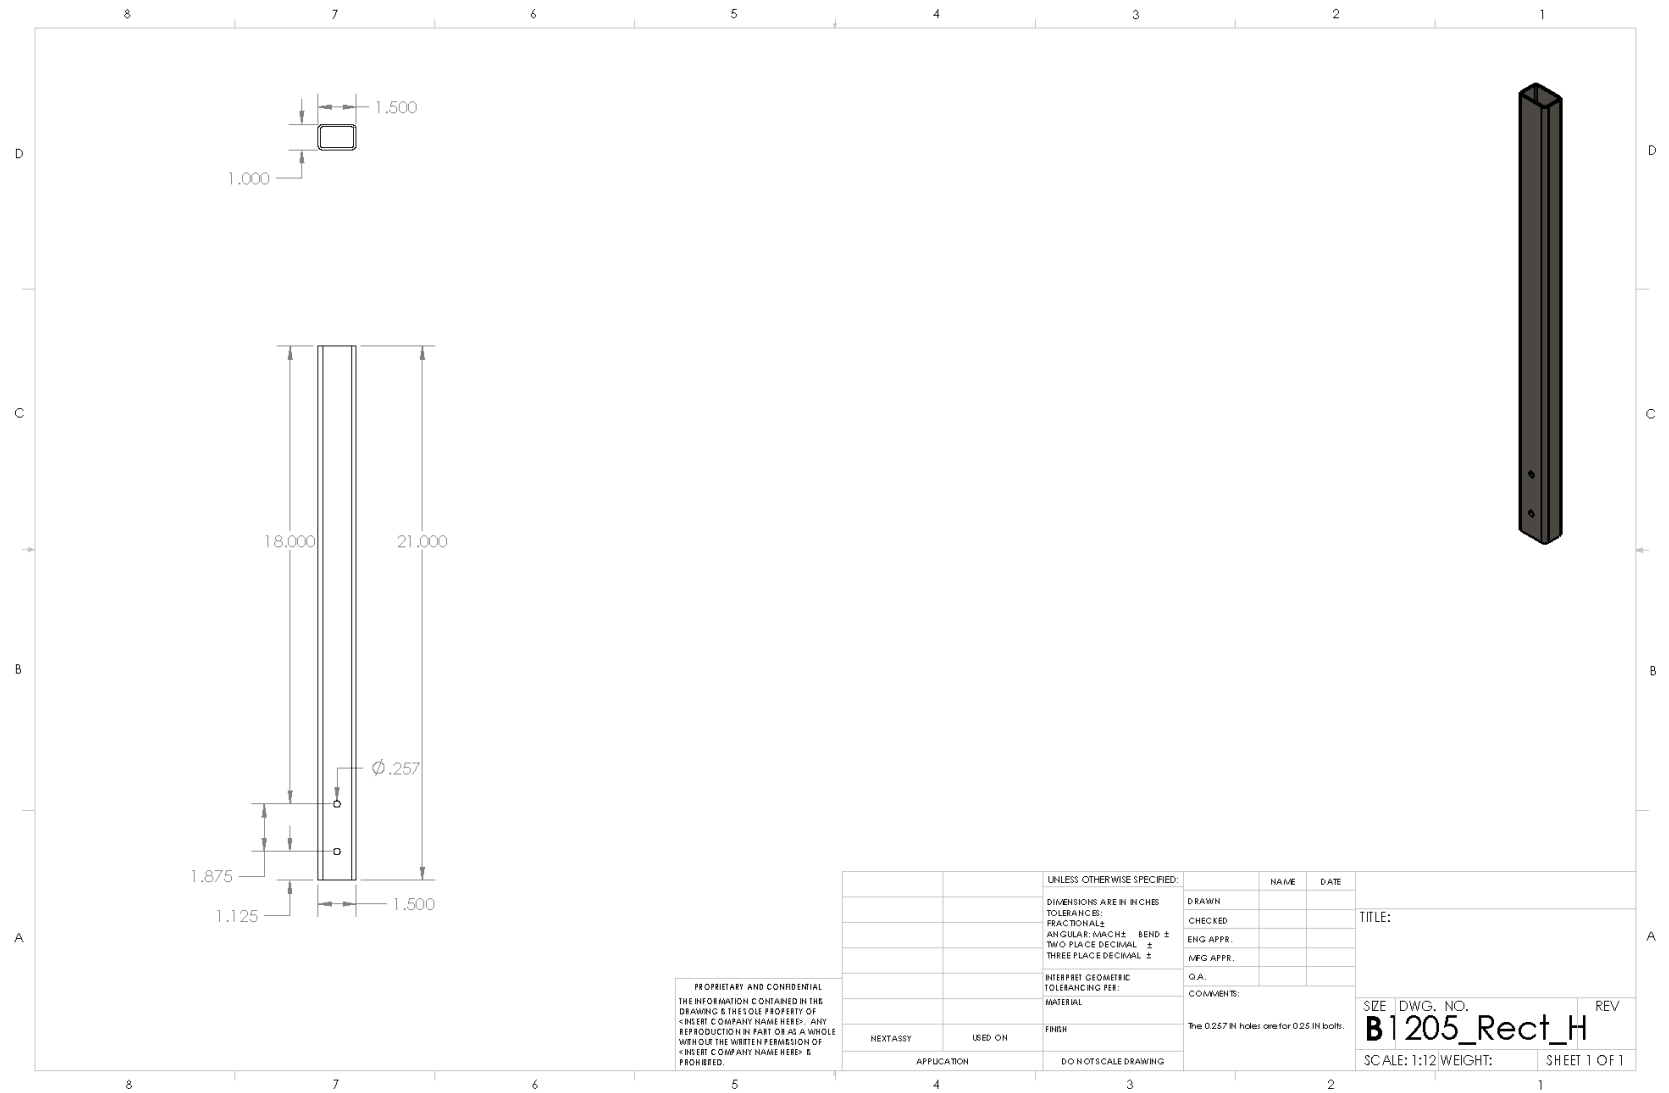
Drawing of Part 1205 with Holes for Mounting Plates
